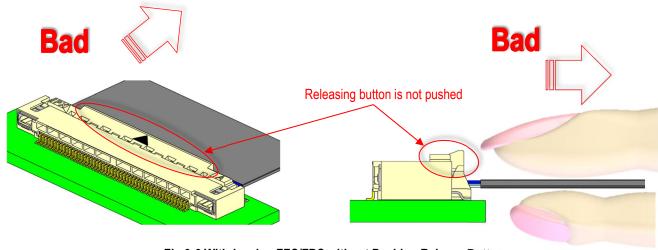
Withdrawing FFC/FPC without Pushing Release Button
